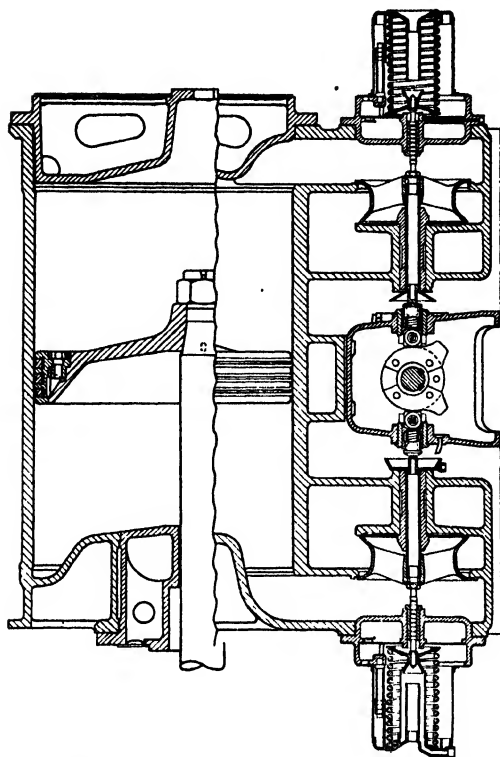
Section through L.P. exhaust valve of Lentz engine.
